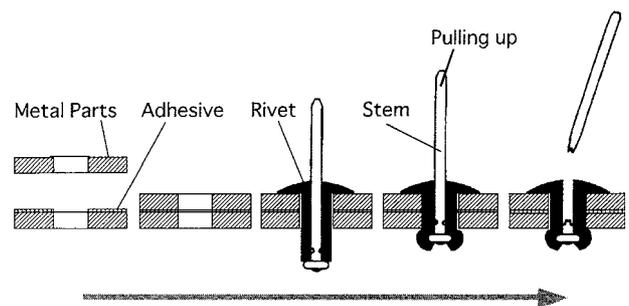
Schematic illustration of the joining process used for adhesive and rivets.
